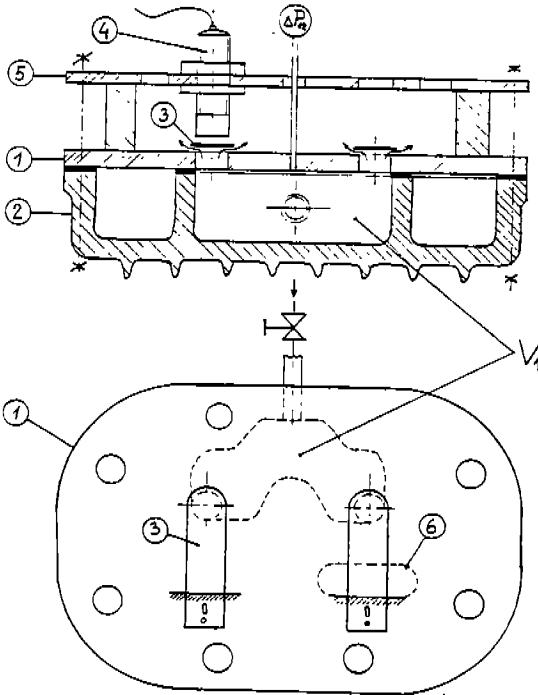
Set up for experiments with valve B. 1 valve seat plate; 2 cylinder head; 3 valve reed; 4 eddy current displacement transducer; 5 transducer mounting plate; 6 cavity machined in seat plate(.5mm deep)
